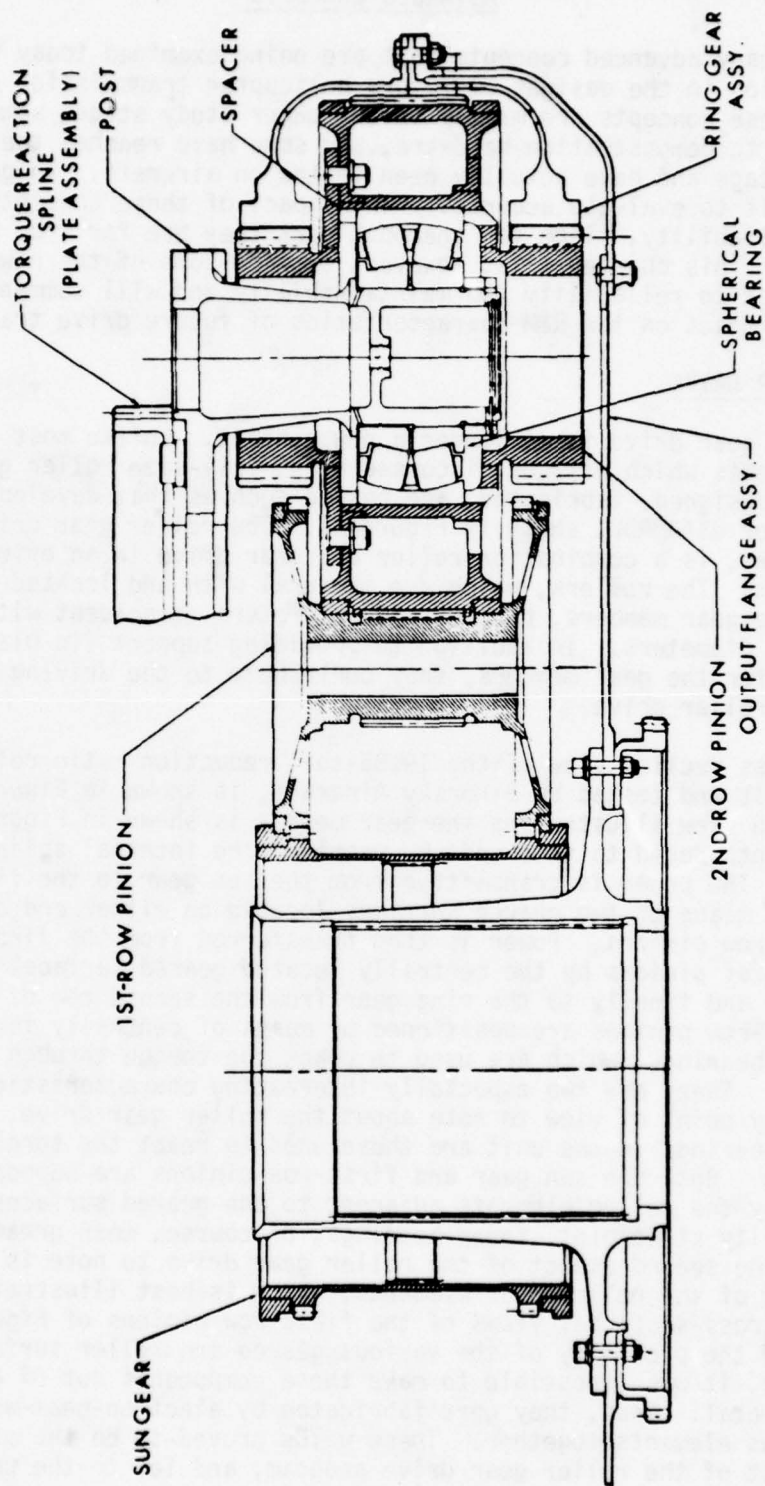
Cross Section of Sikorsky Roller Gear Drive.
